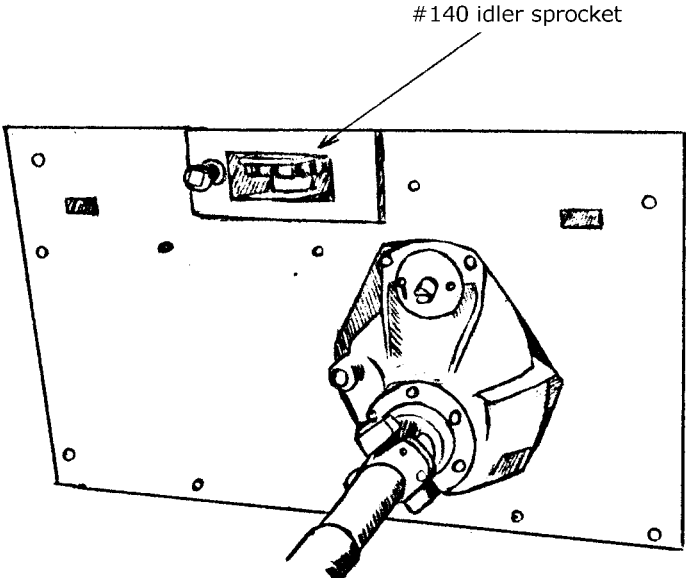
Mounted front plate. Before mounting, cut away sections to allow differential and sprockets to protrude, where necessary.
